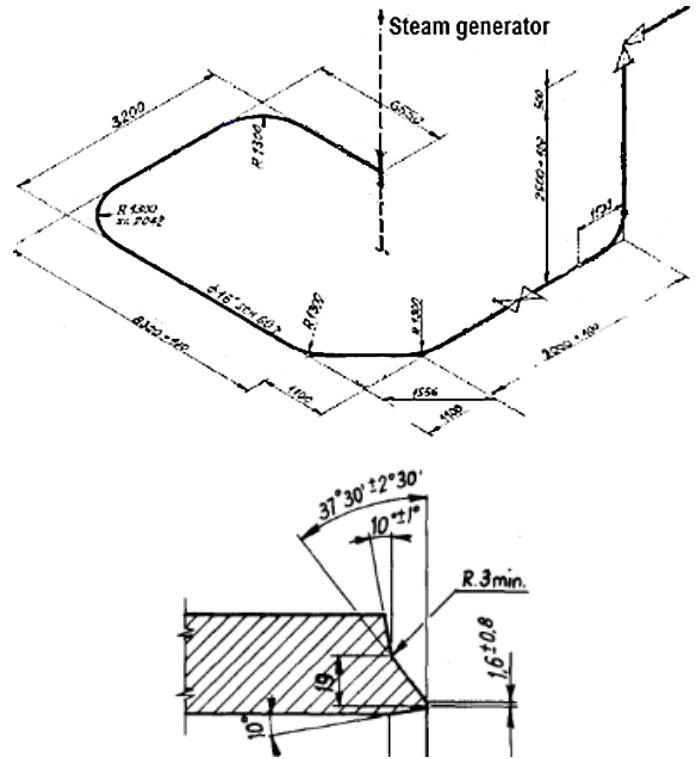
[1] HRSG PIPELINE LAYOUT, WELD CROSS-SECTION SCHEME FOR THE CIRCUMFERENTIAL BUTT JOINT
